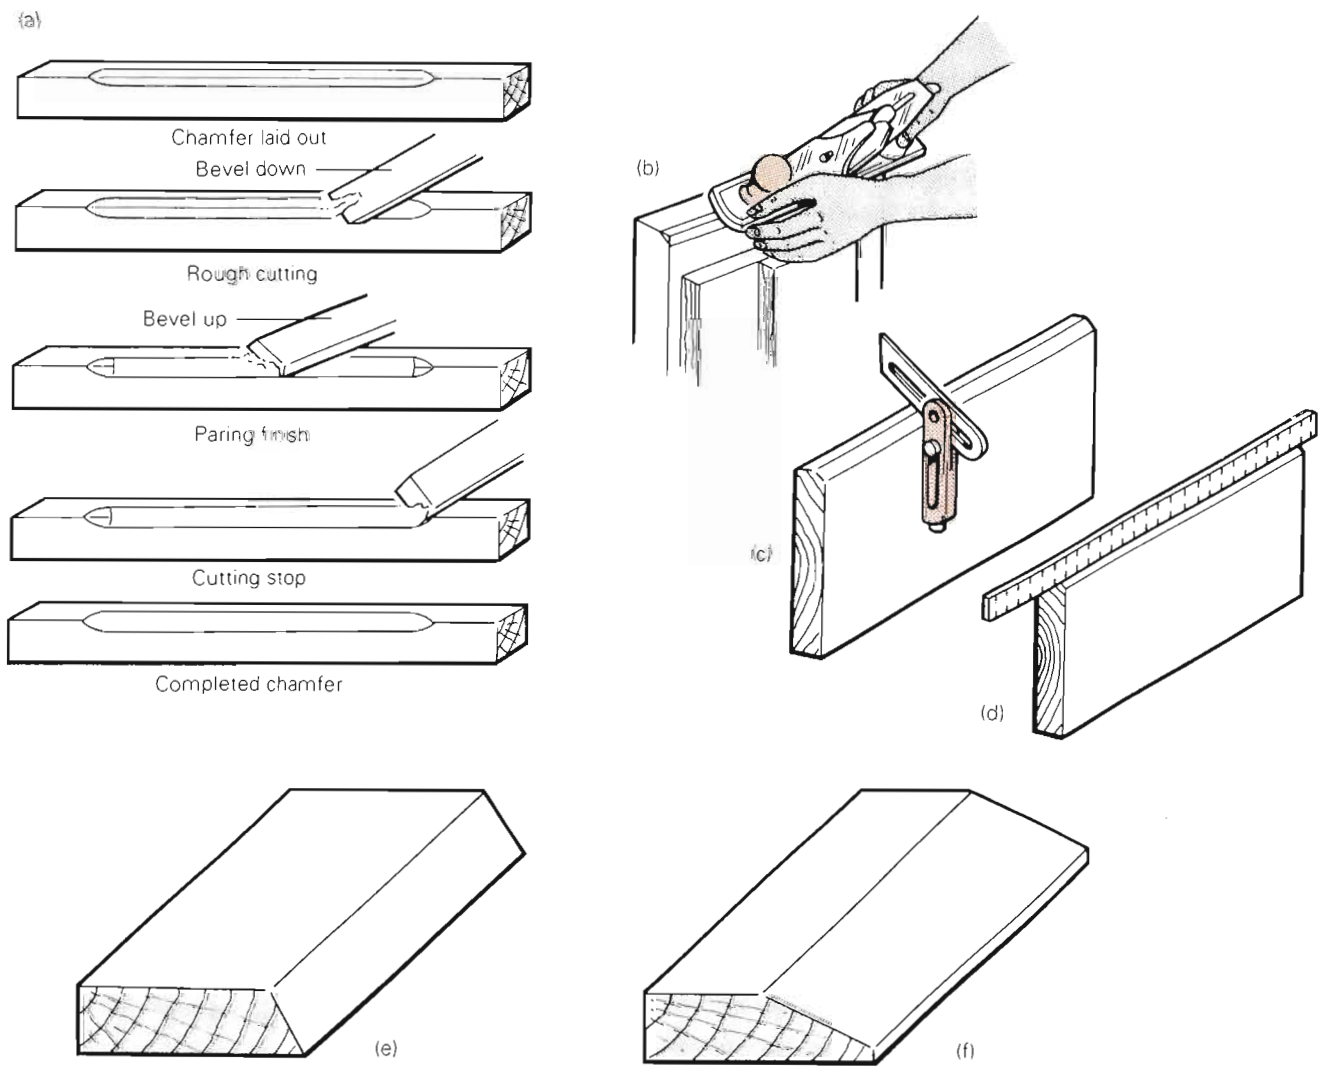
Chamfering and bevelling: (a) chamfering with a chisel, (b) chamfering with a plane, (c) testing flatness, (d) testing straightness, (e) bevelled edge, (f) splayed edge.
